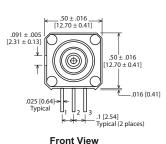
SHA: Dual Potentiometer or RS, Solder Hooks, 1/4" Dia. Bushing
